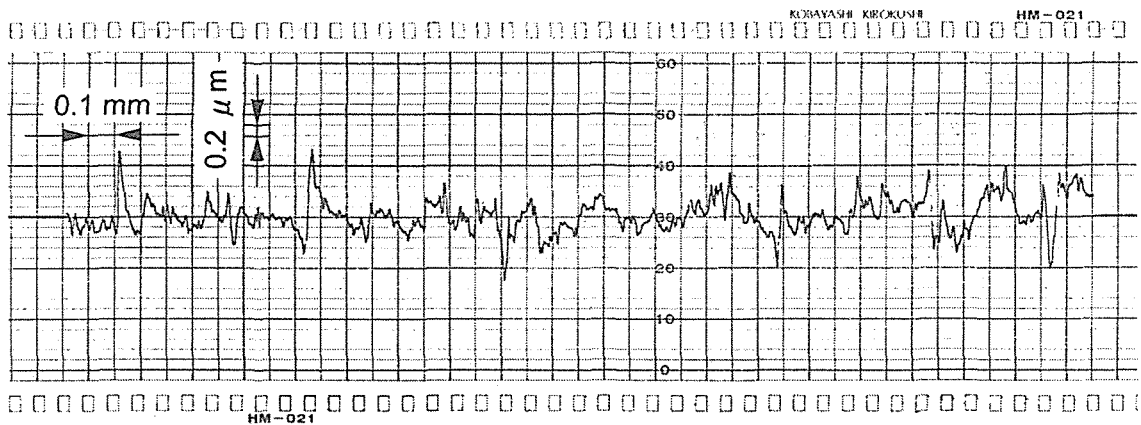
Surface roughness by facemilling (finish) of cast iron
